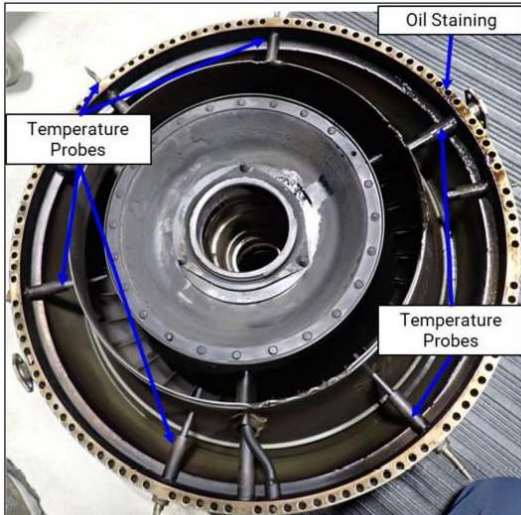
Rear View of the 1st Low-Pressure Turbine Nozzle Assembly
